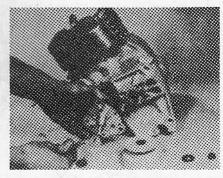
View showing method of using puller to remove clutch driver.
